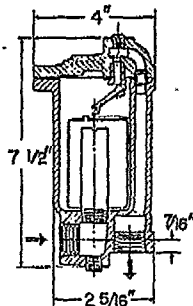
Dimensions, No. 701 with right angle connections.
